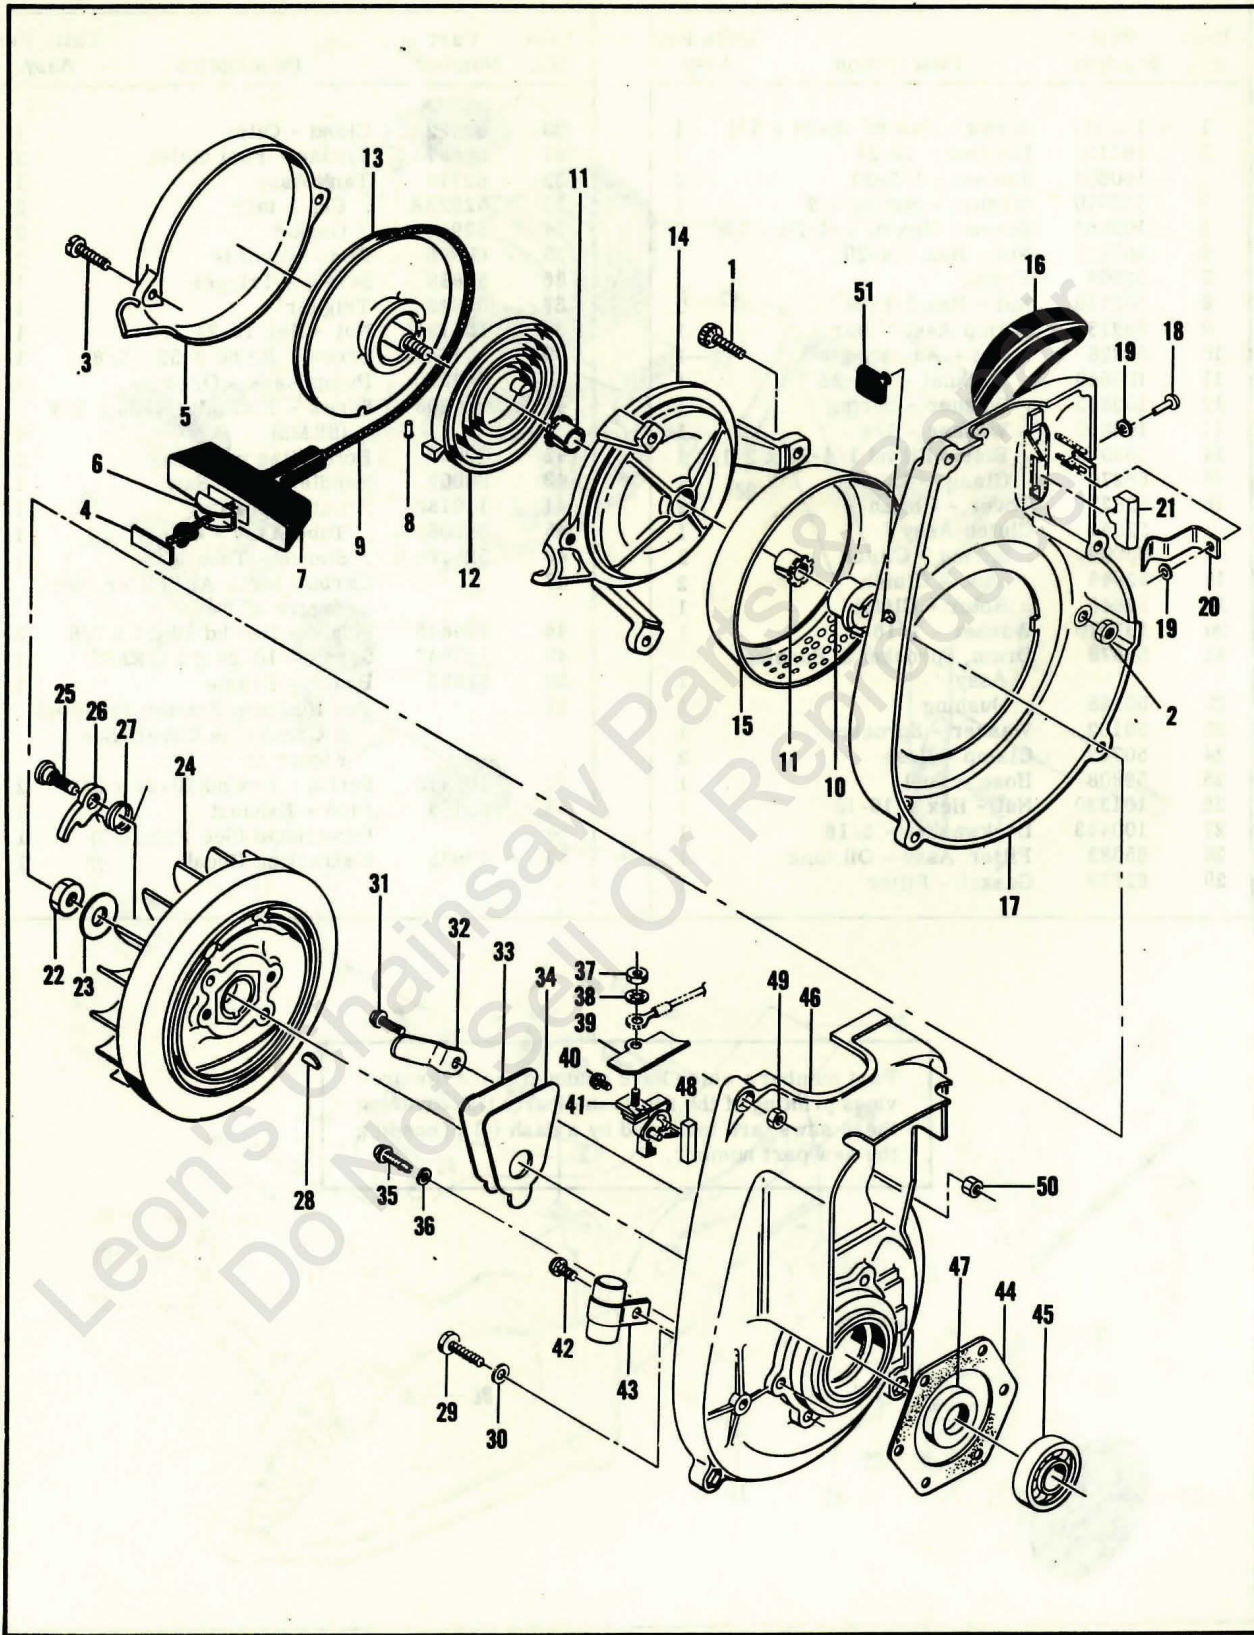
Fan Housing, Starter, Flywheel and Crankcase Cover
